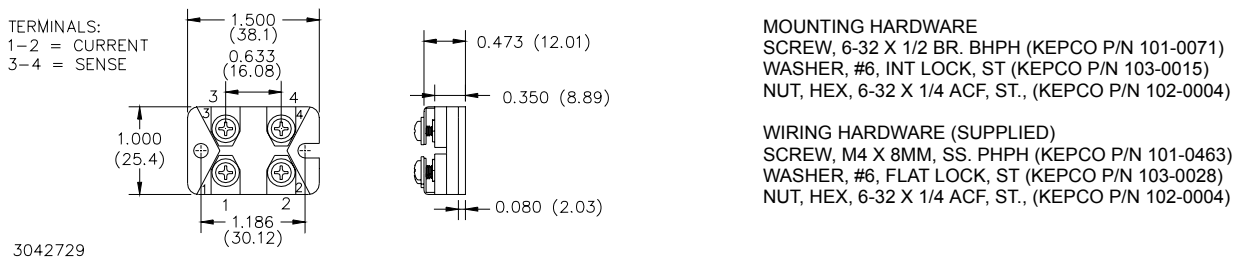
MECHANICAL OUTLINE DIMENSIONS
